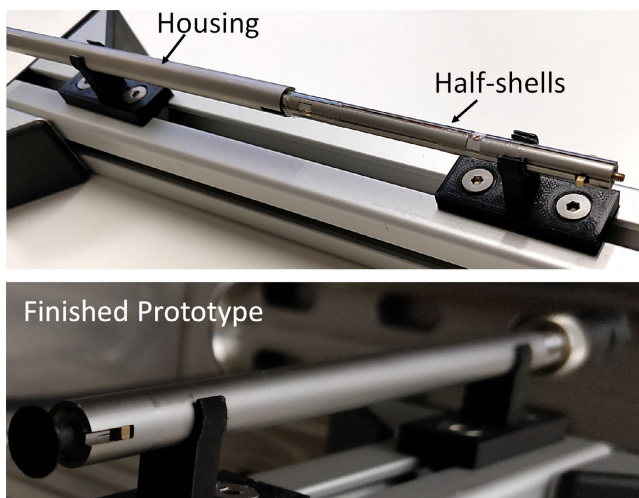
Half-shells inserting into housing (upper part), finished prototype with attached electrical plug (lower part).^[31]
